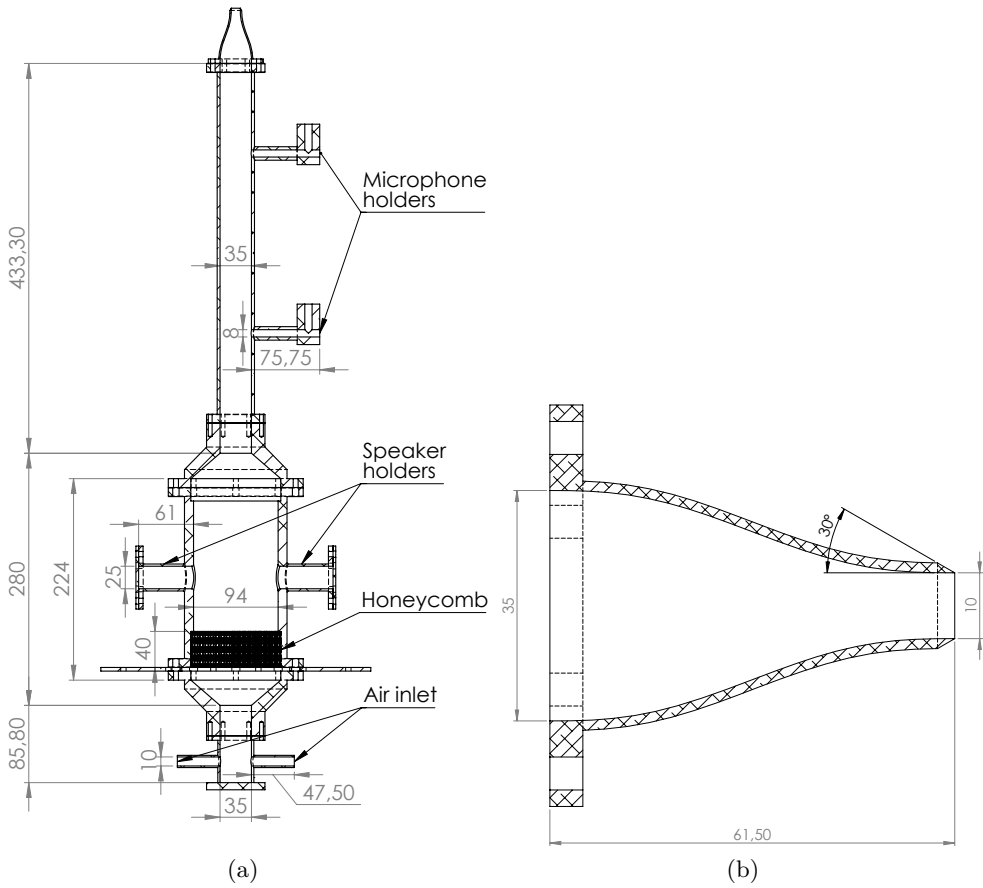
Sketch of (a) nozzle setup and (b) nozzle. Dimensions are given in mm.
